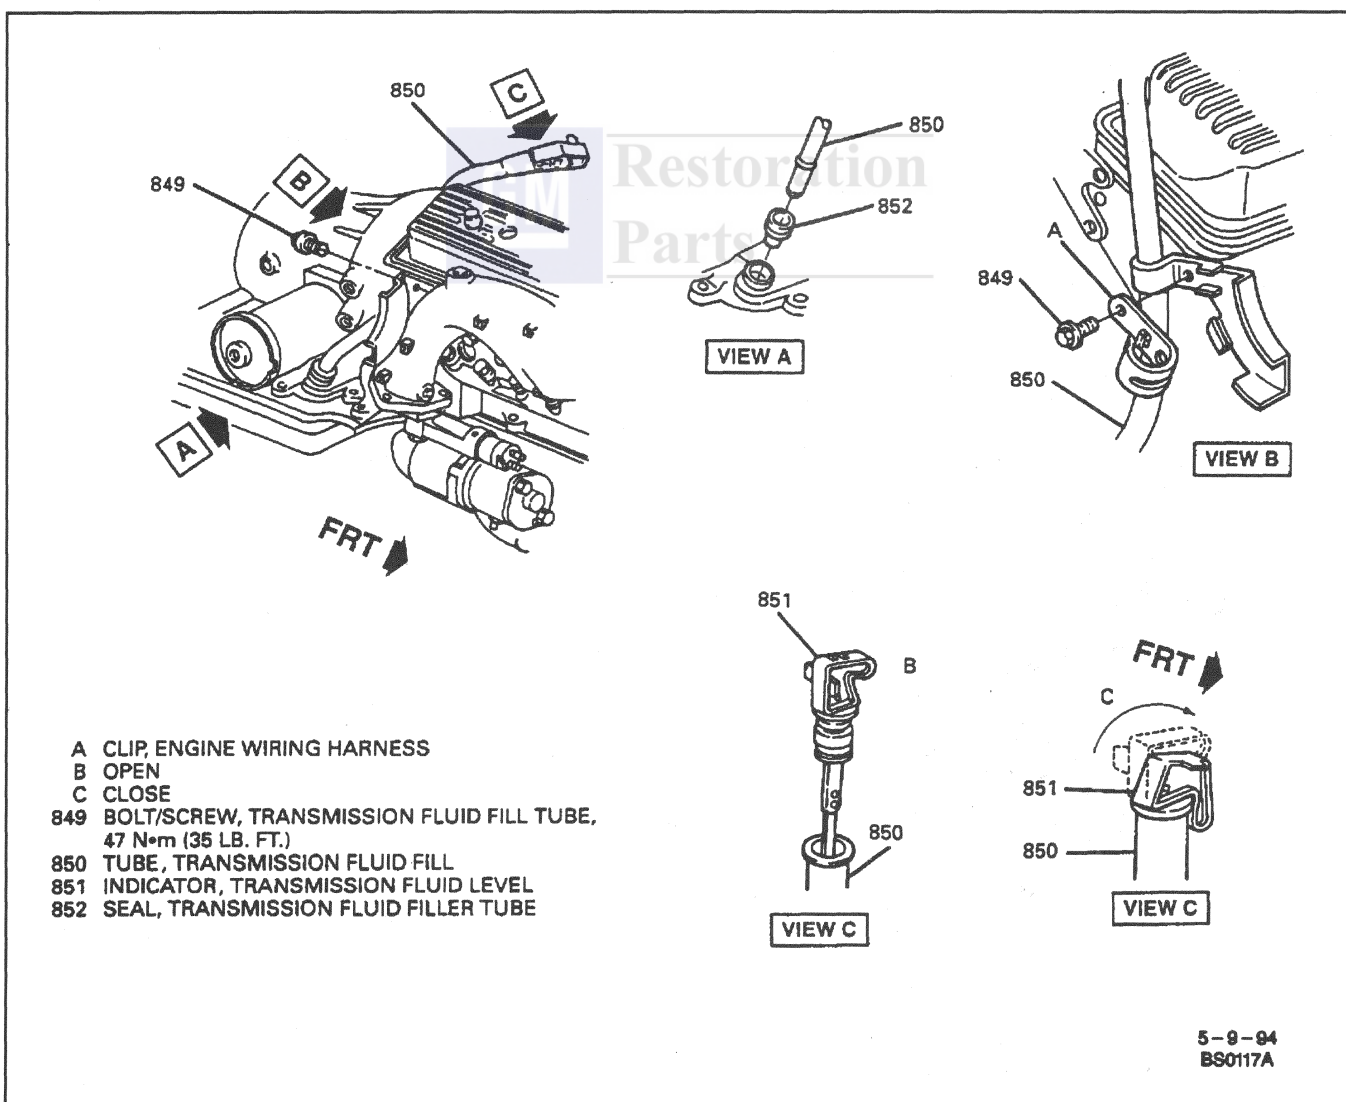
Transmission Fluid Filler Tube and Transmission Fluid Level Indicator
